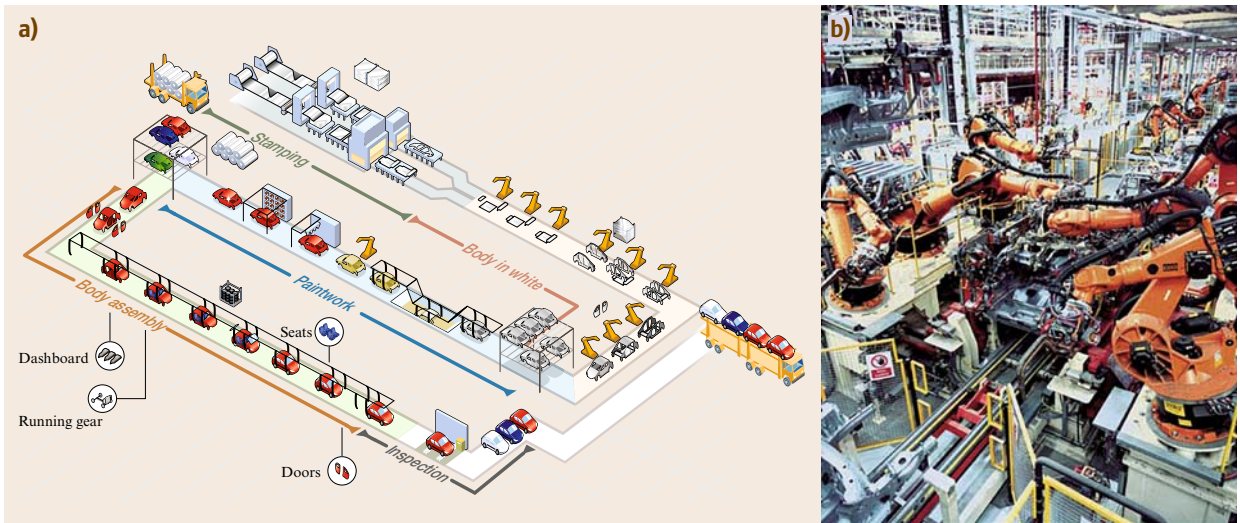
,b Car body assembly. (a) A car body assembly usually follows the illustrated steps: Stamping of the metal sheet into plates, fixing and alignment of the plates on trays, spot welding, painting the car body, and final assembly of the car body (doors, dashboard, windcreens, power-train seats, and tires). Car factories can host well over 1000 robots working two to three shifts per day. (Courtesy PSA Peugeot Citroën, Paris and Art Movies, Paris) (b) The Mercedes A class assembly in Rastatt Germany is highly automated. The picture shows spot welding robots along the, *body in white* transfer line. Trays carrying car bodies pass through the *robot garden
